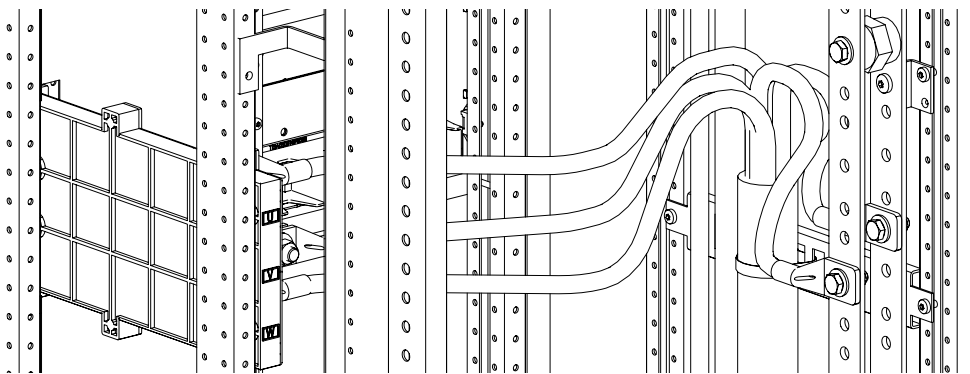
Example of MNS Rear access protection and neutral conductor connection
